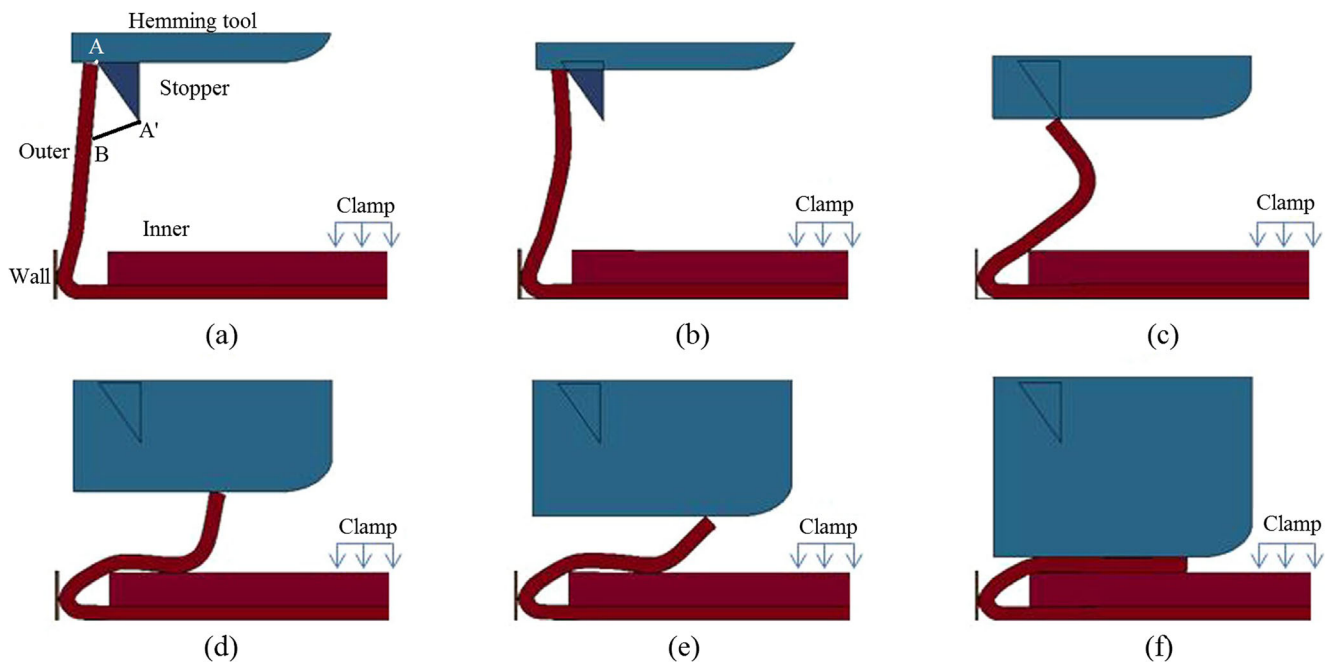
The operational sequence of the hemming with angled stopper: a initial state, b the edge of flange is constrained by stopper, c flange touches the inner panel when the edge is almost released from the stopper, d and e flange unfolded, f finished hem [148]
